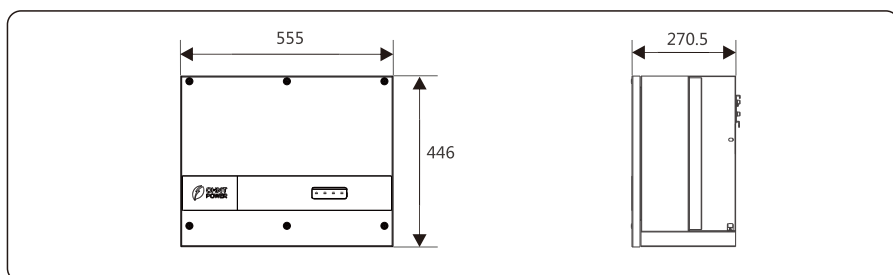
The dimensions of the inverter by front & side views (unit: mm)
